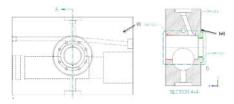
Drawing of TD-63 Al-6061 hydraulic actuator body. The areas that need to be repaired are indicated in the drawing.
